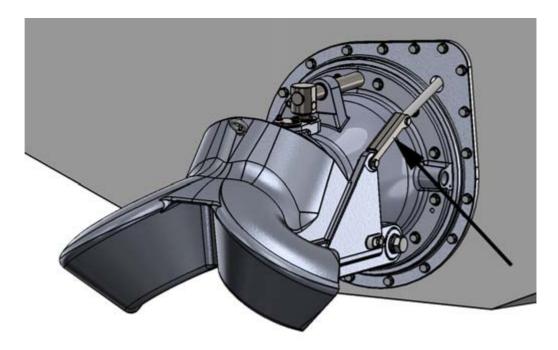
The rod between the hydraulic cylinder and the reversing deflector
